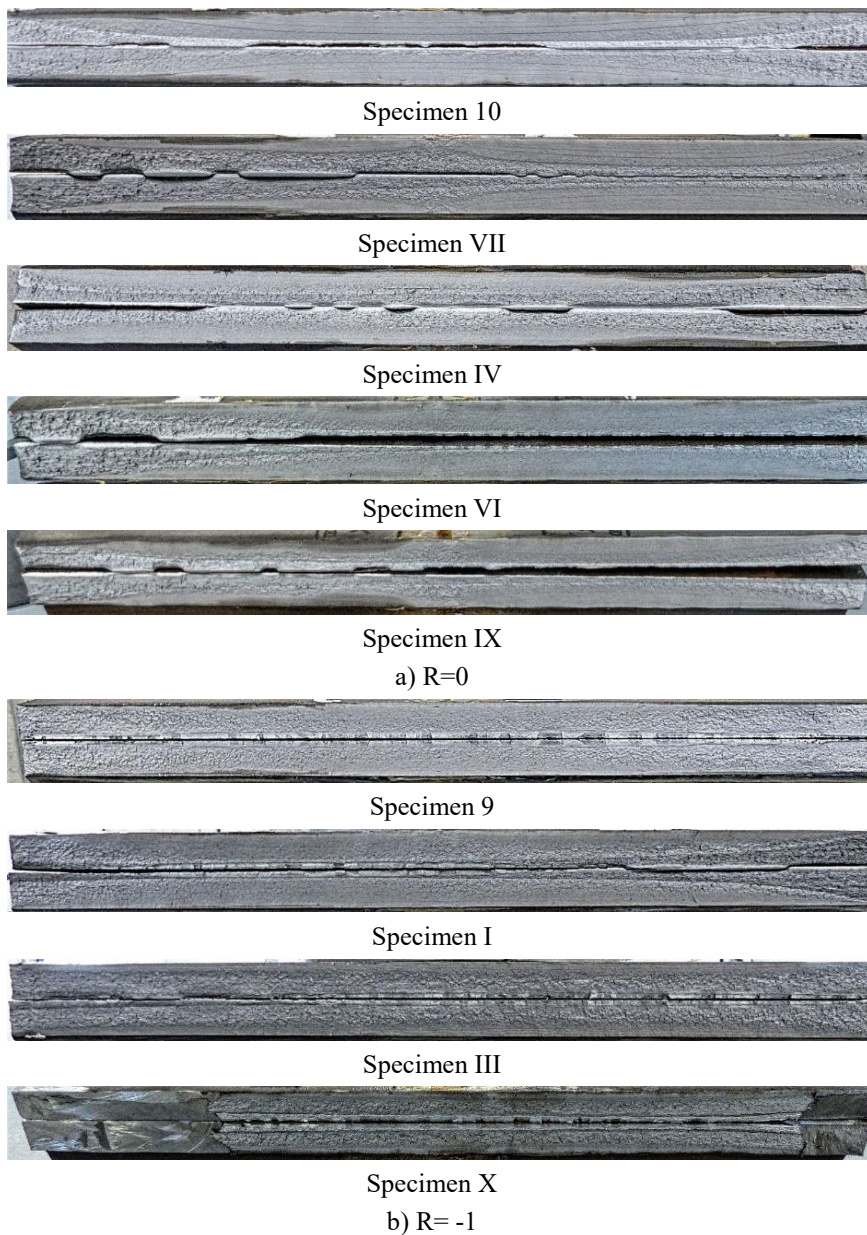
Fracture surfaces and beach marks on test specimens
